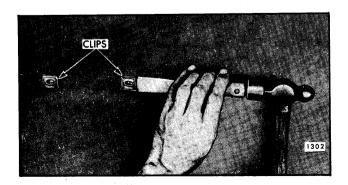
Removal of Bath-Tub Type Molding Clip
